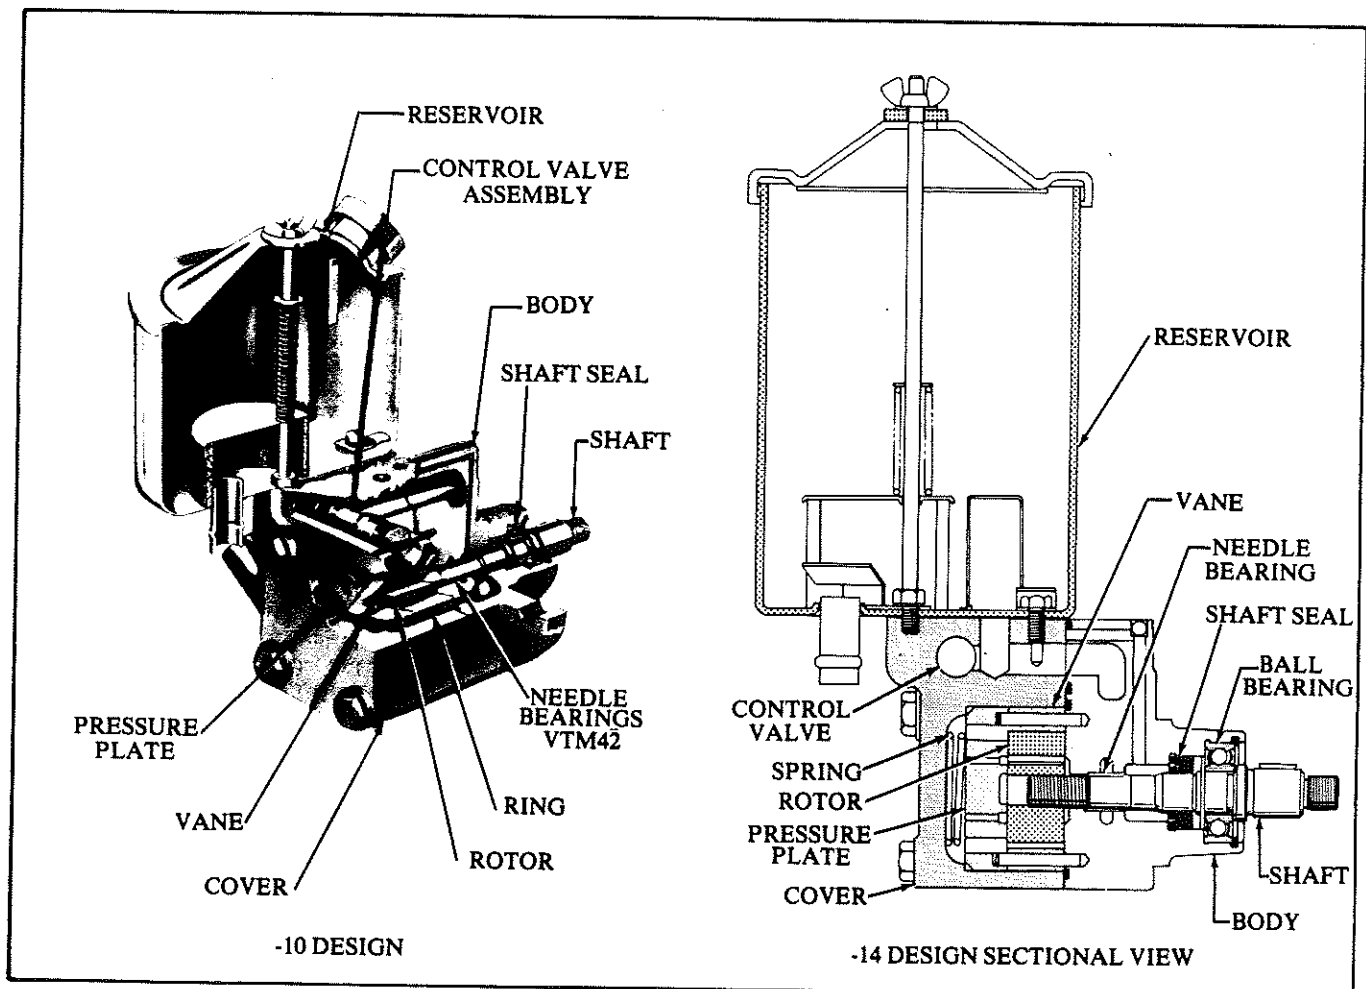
VTM27/42 Pump - Cutaway and Sectional Views
